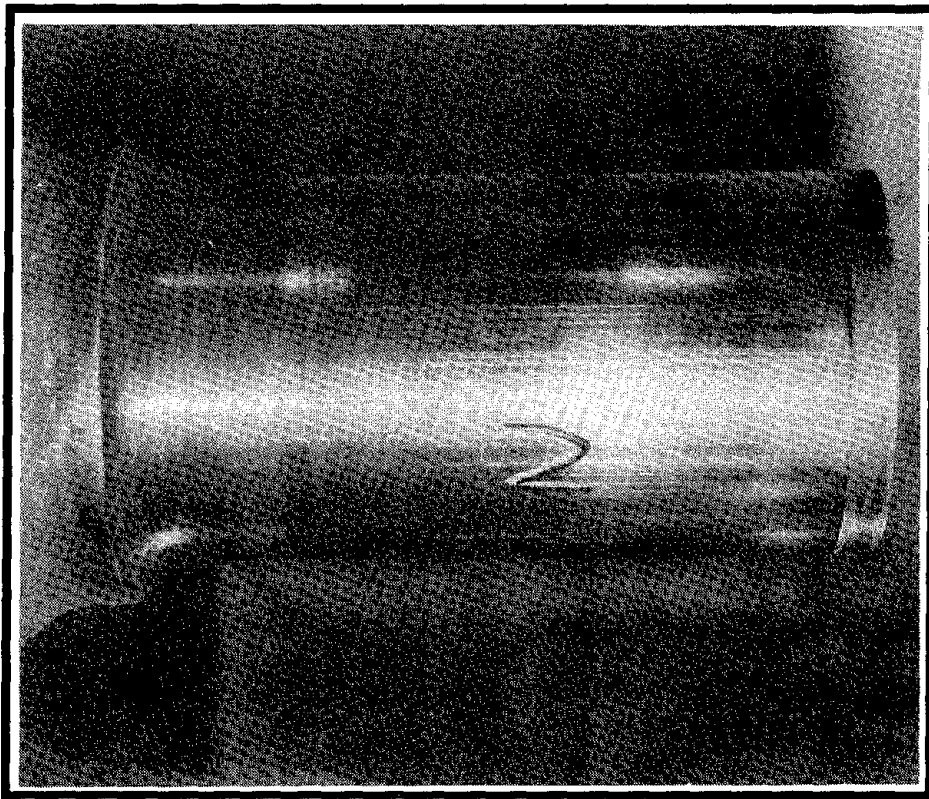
RBFM II Post Test Axle Journal Condition -- Bearing M
